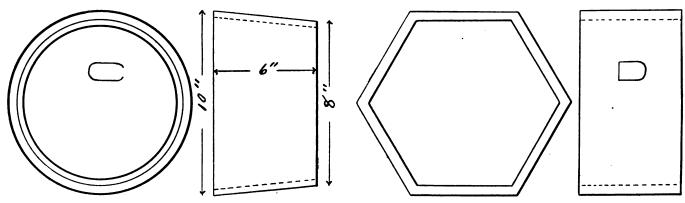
THE FORGING OF SEAMLESS BANDS.
